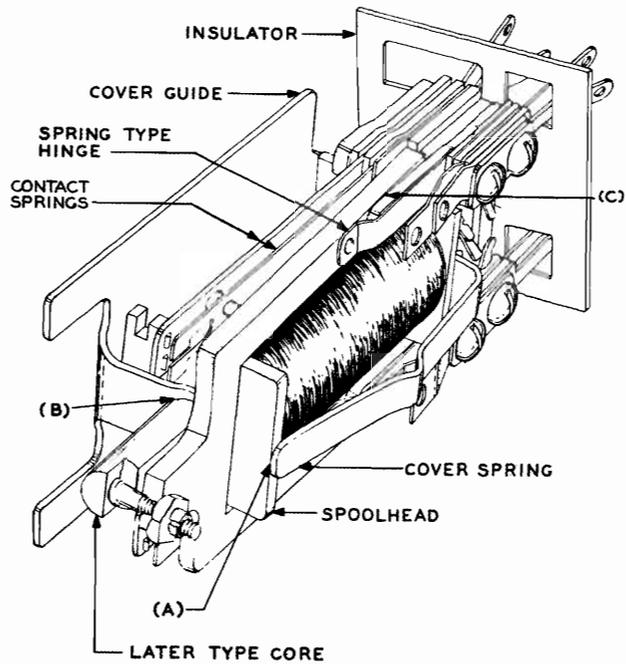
Y-type Relay Equipped With Spring-type Hinge and Arranged For Mounting Individual Cover
